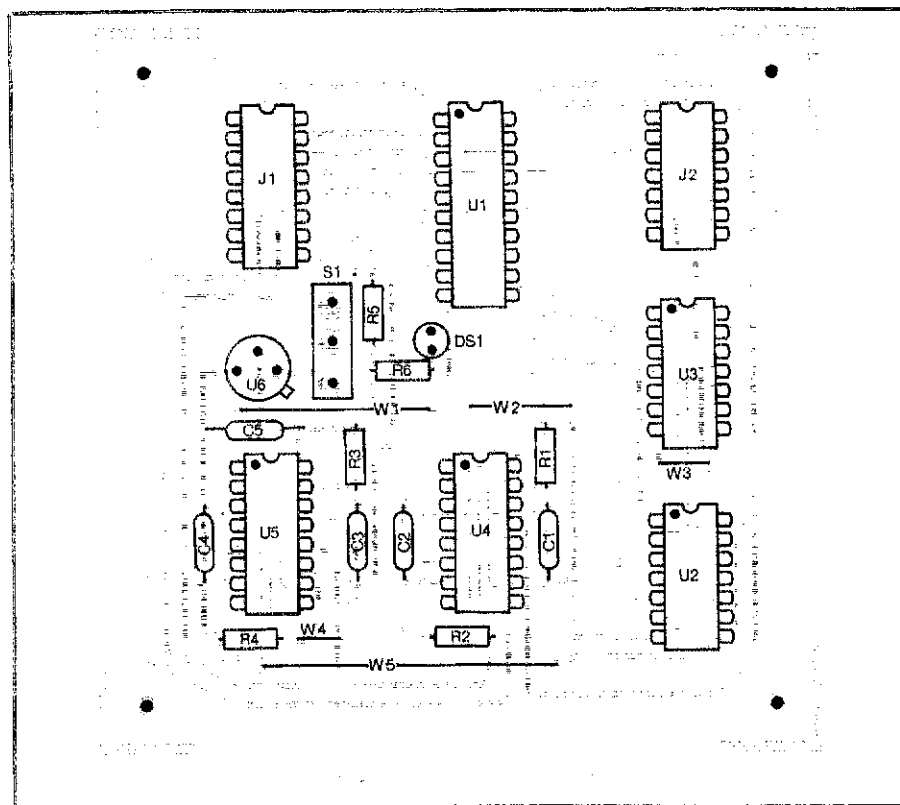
Parts-placement diagram for the interface board. Components are shown on the nonfoil side of the board, and gray areas represent copper on the bottom side.
